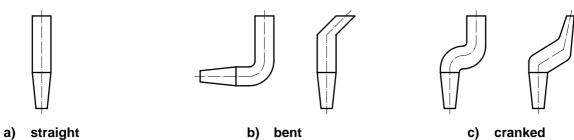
Spot welding electrodes with male taper at mounting end and flat tip
